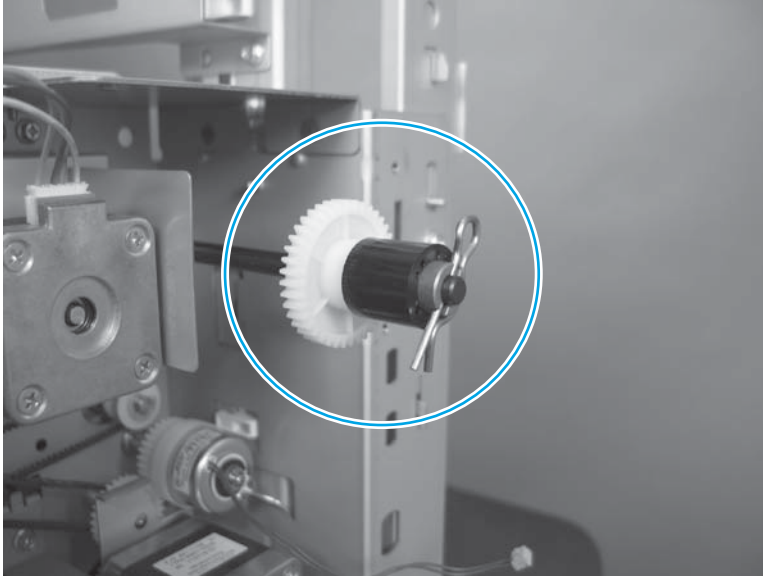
Reinstall the upper cross member assembly (6 of 7)
